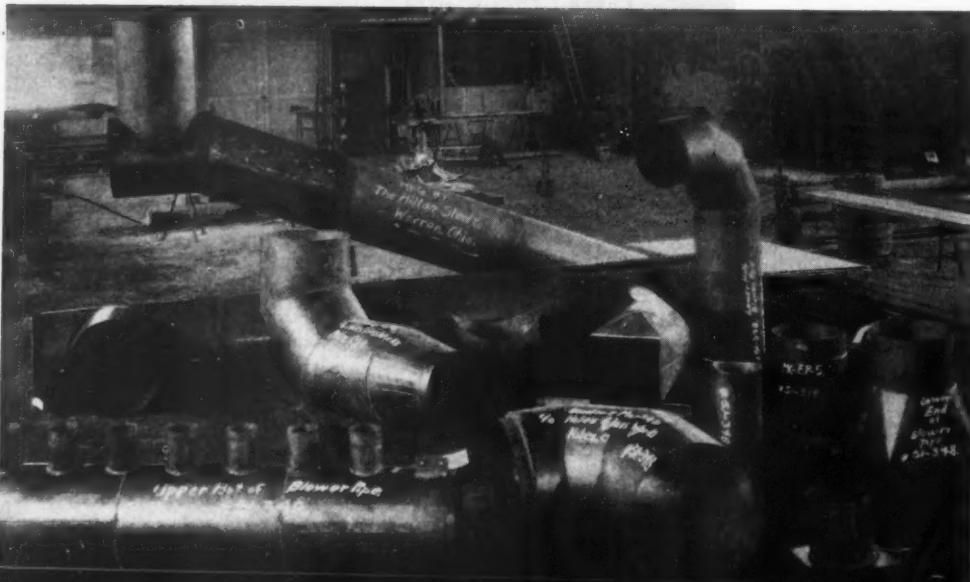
Miscellaneous sheet metal fittings made by welding.
